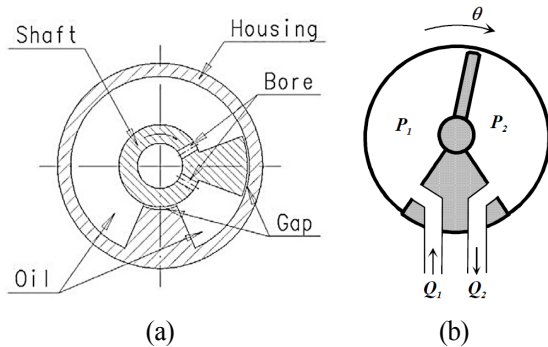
Schematic of adjustable large range rotary deployment(ALRD) damper(a) and hydraulic rotary actuator(b)
